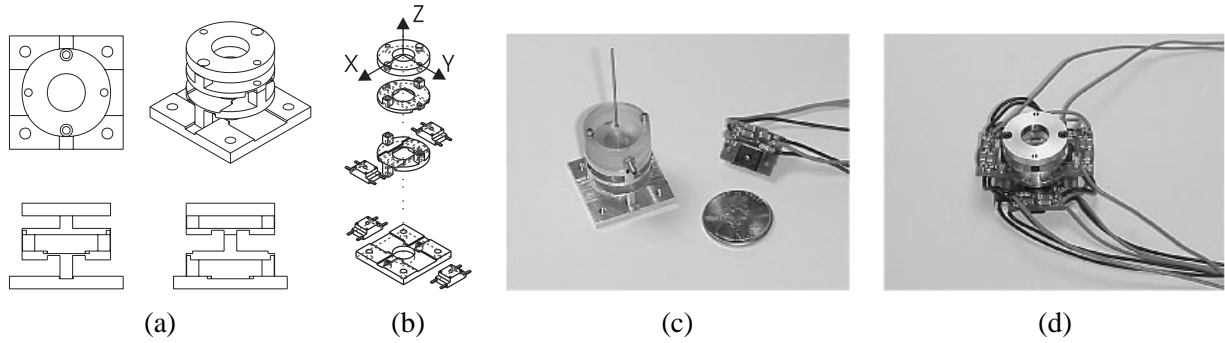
3-Axis force sensor: (a) drawing of the mechanical flexure, (b) exploded assembly drawing of the flexure and single-axis load cells, (c) photograph of the flexure with clear lexan vacuum chamber and one load cell, (d) flexure with four load cells in place.
